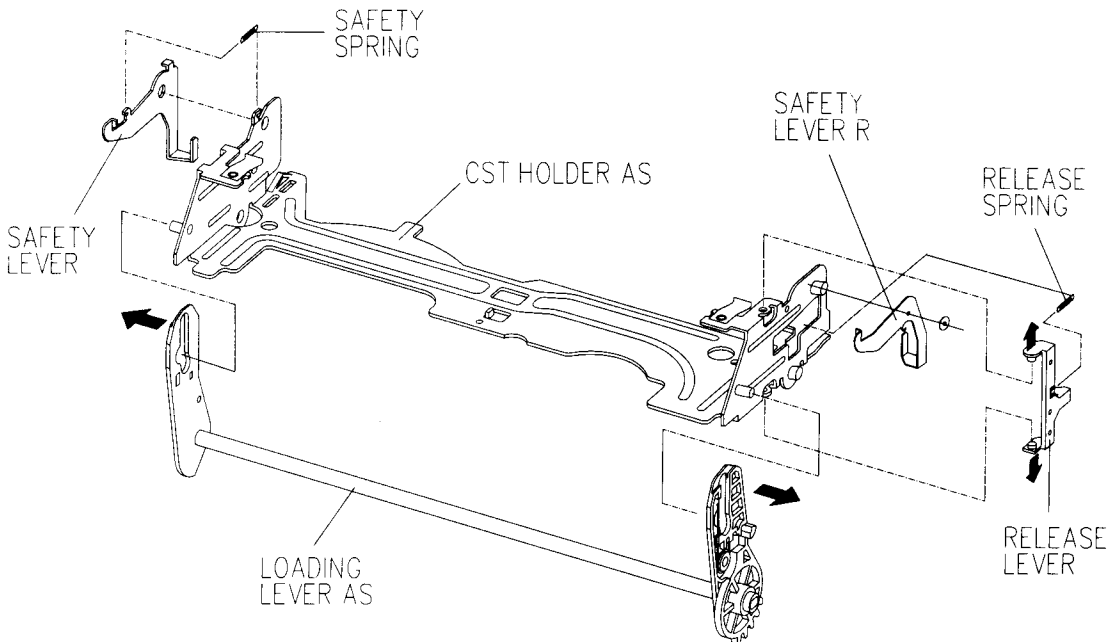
DISASSEMBLY OF THE CASSETTE HOLDER ASS'Y
